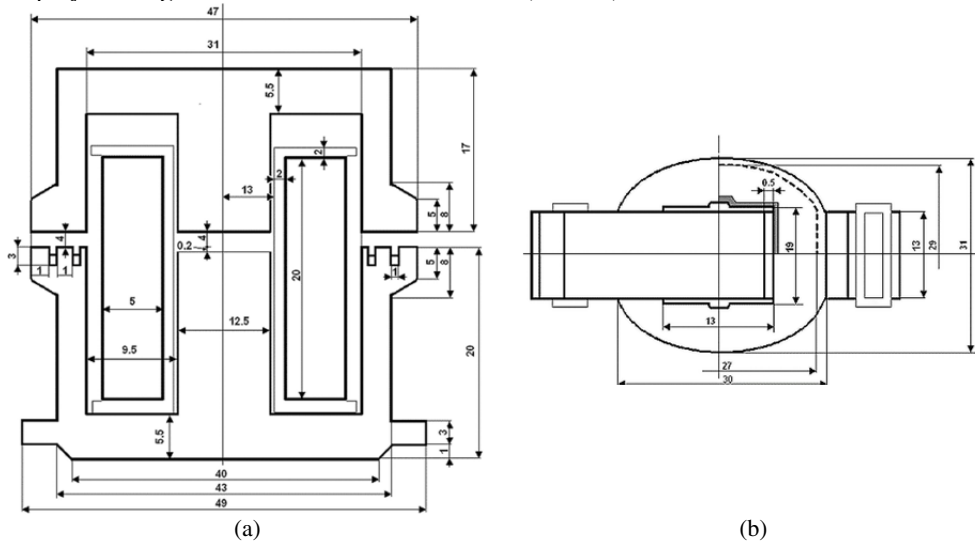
K10 electromagnetic contactor actuator drawing. Side view (a) and top view (b). Coil is replaced with HTS-2G wire. Sizes are in mm.
